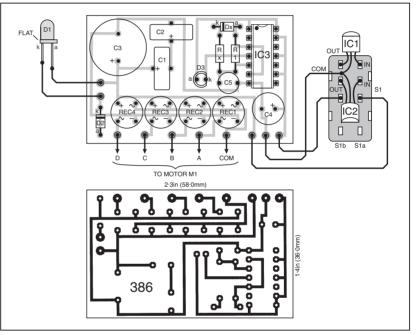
Printed circuit board component layout, wiring details and full-size copper foil master pattern for the Wind-Up Torch Mk II.
